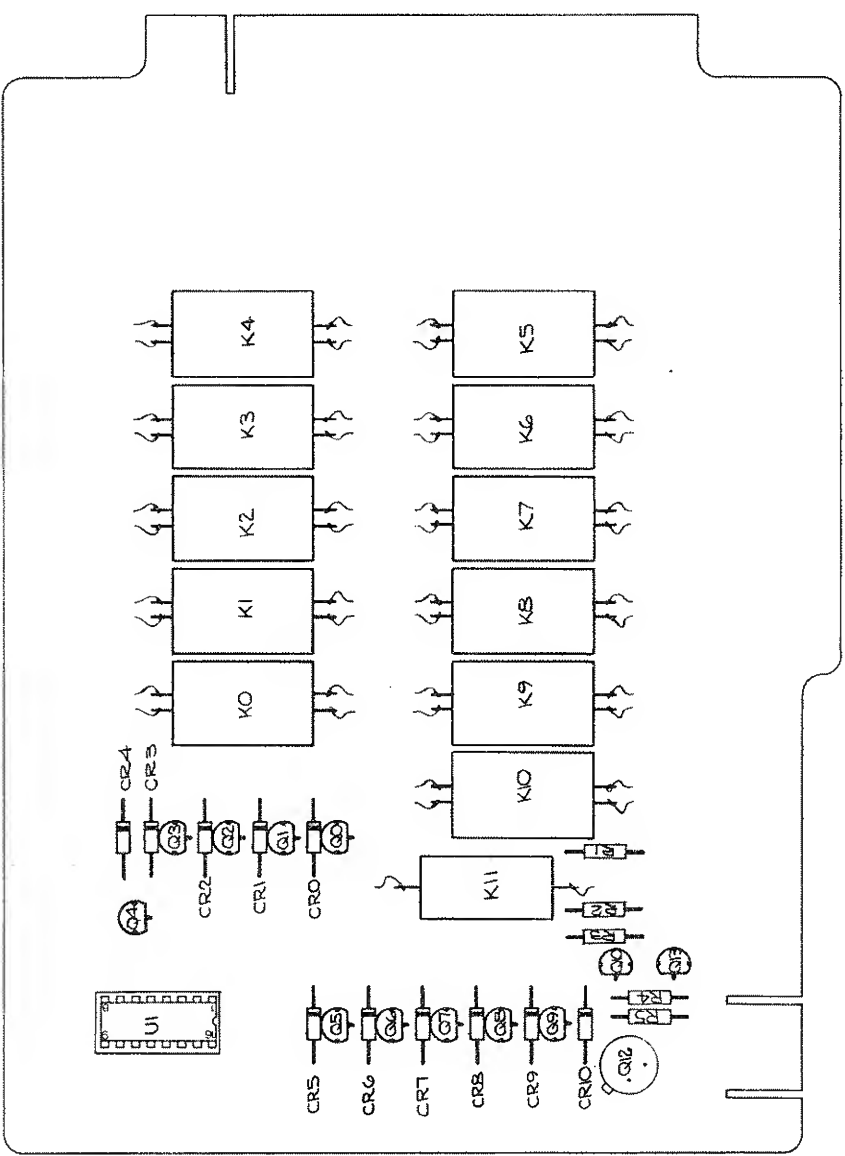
High Performance A/D Converter PCB Assembly (cont)
